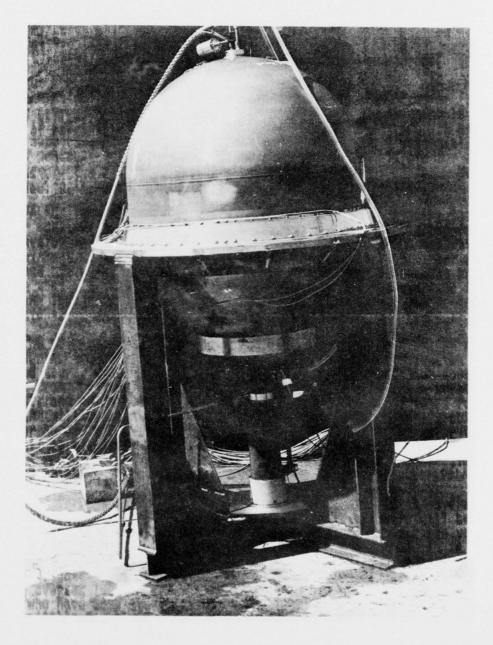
TE-M-364-19 Motor Case in Stand Prior to Testing
